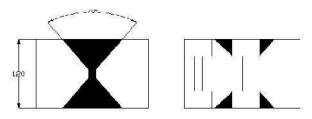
Positions of tensile and compressive specimens on weld block
